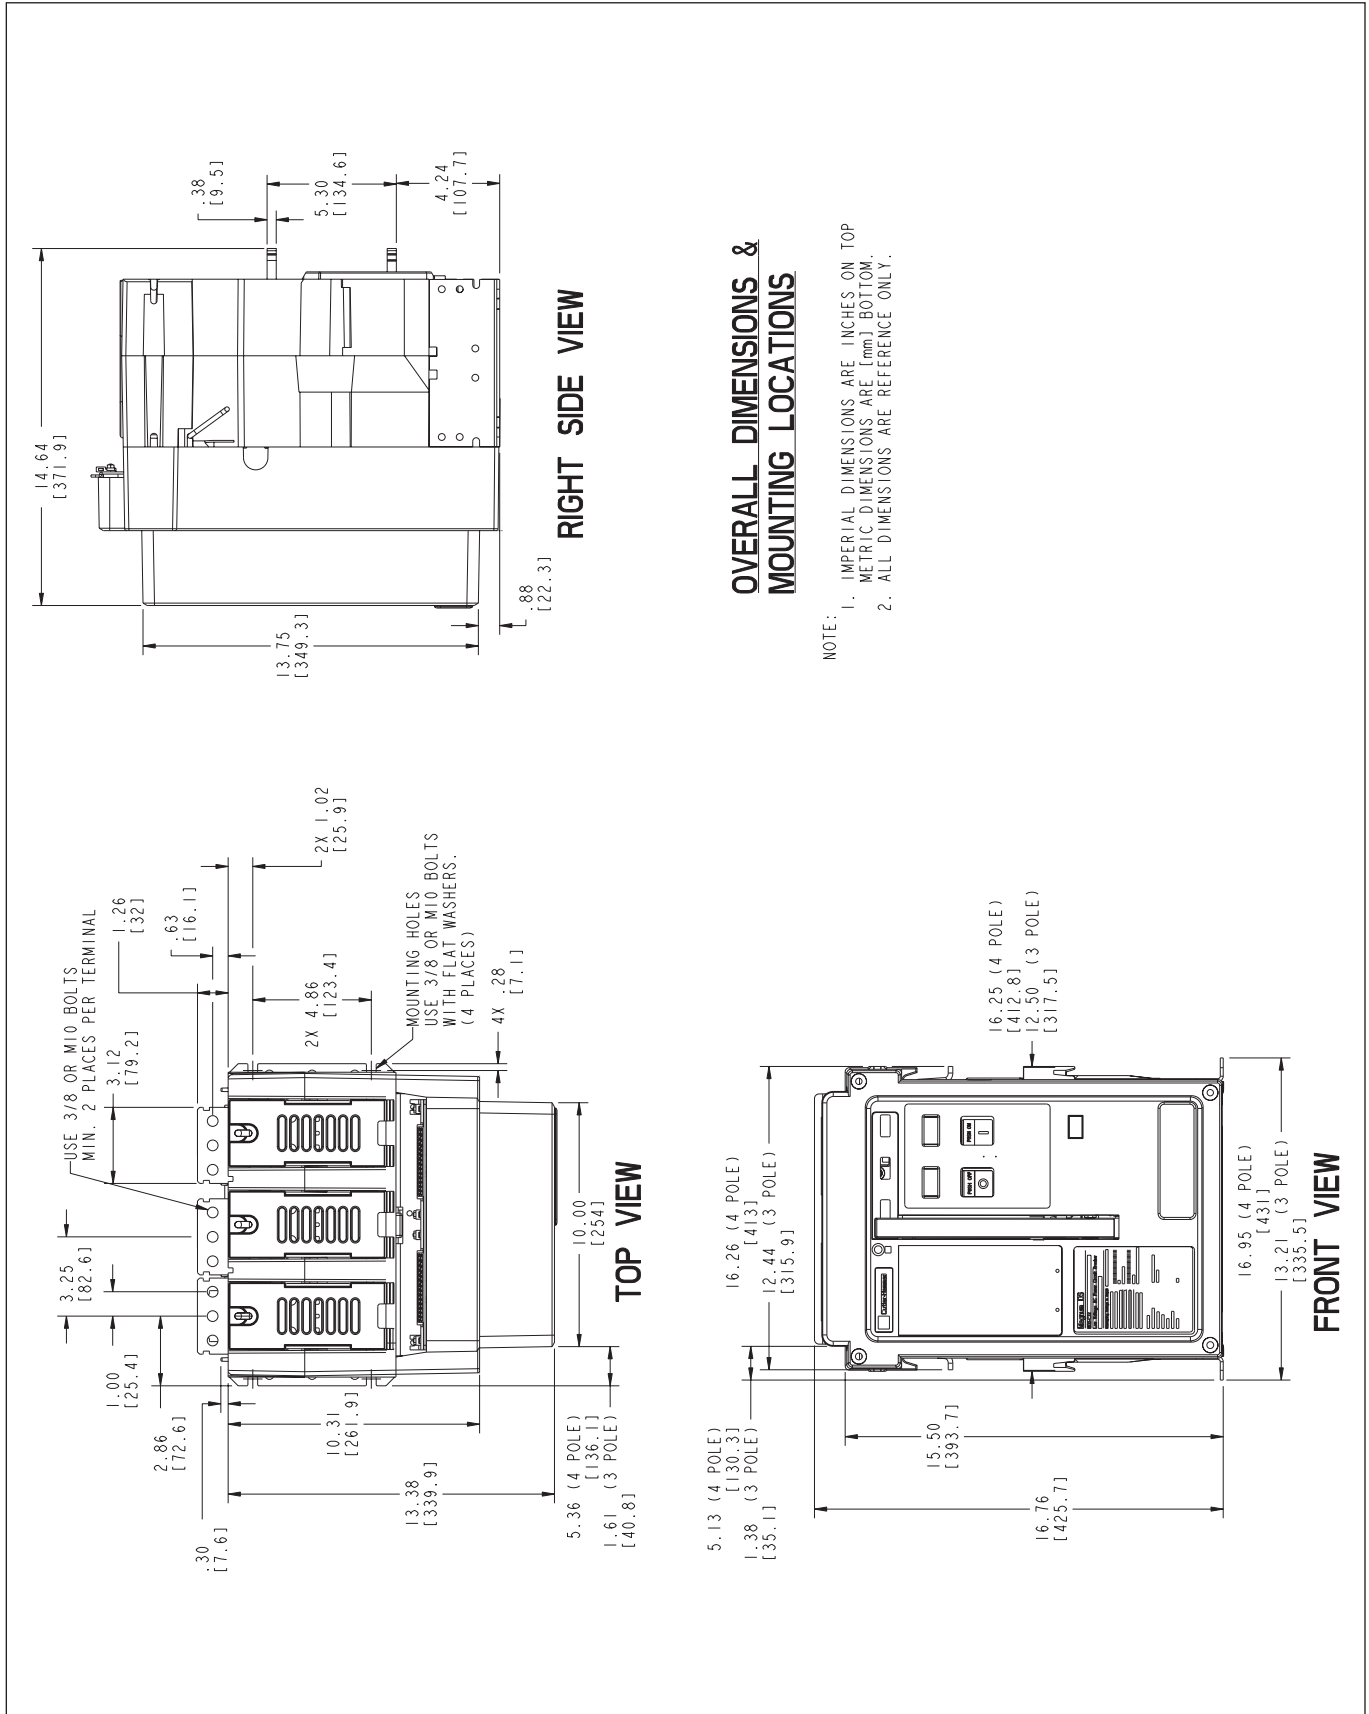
800-2000A Narrow frame fixed breaker (Enclosure and horizontal terminals)
